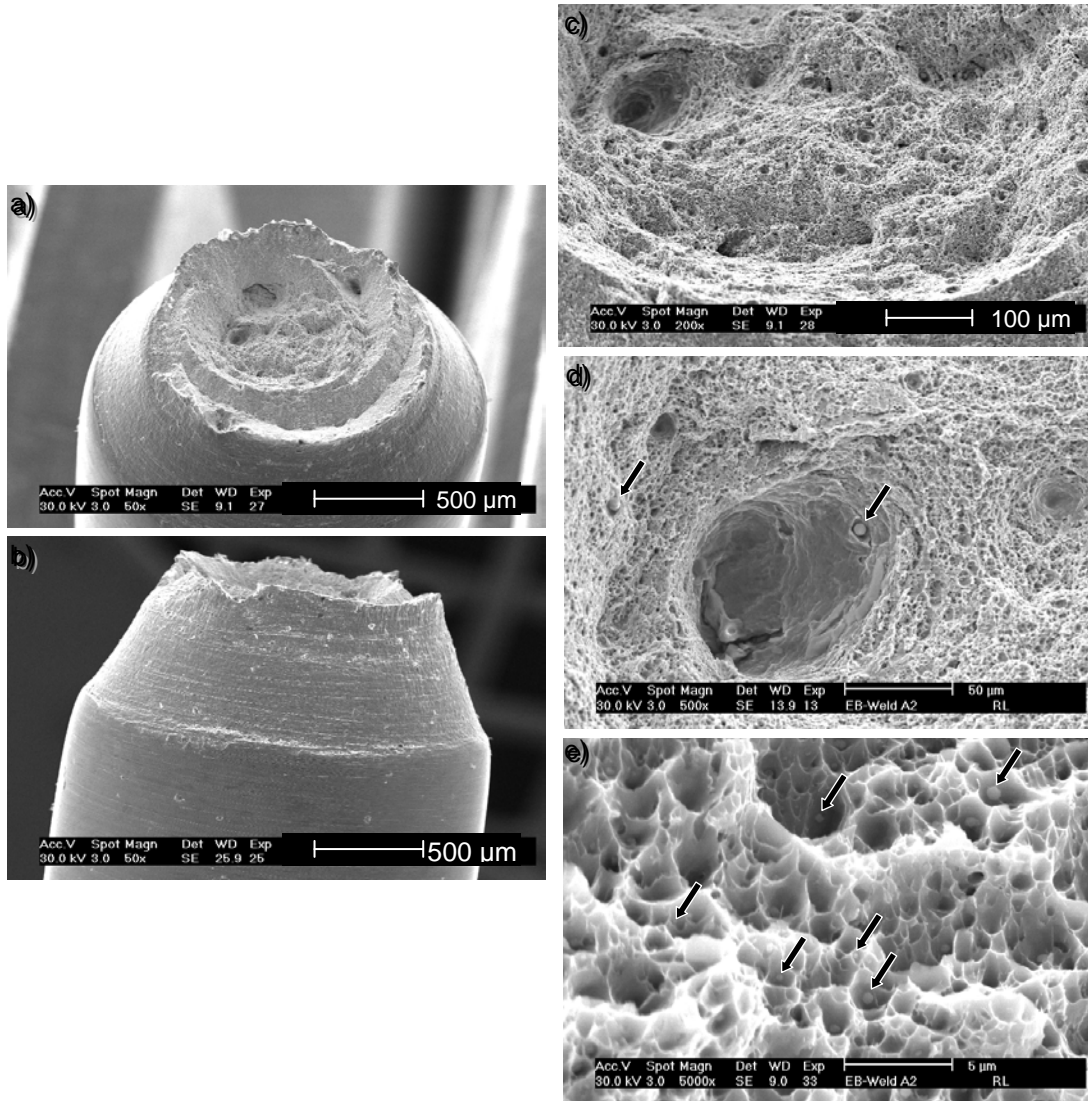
Fractographic examination of an EB-welded sample tested at room temperature. Ductile fracture with yttorium containing particles (0.2 – 5 μm) in dimples indicated by arrows.
